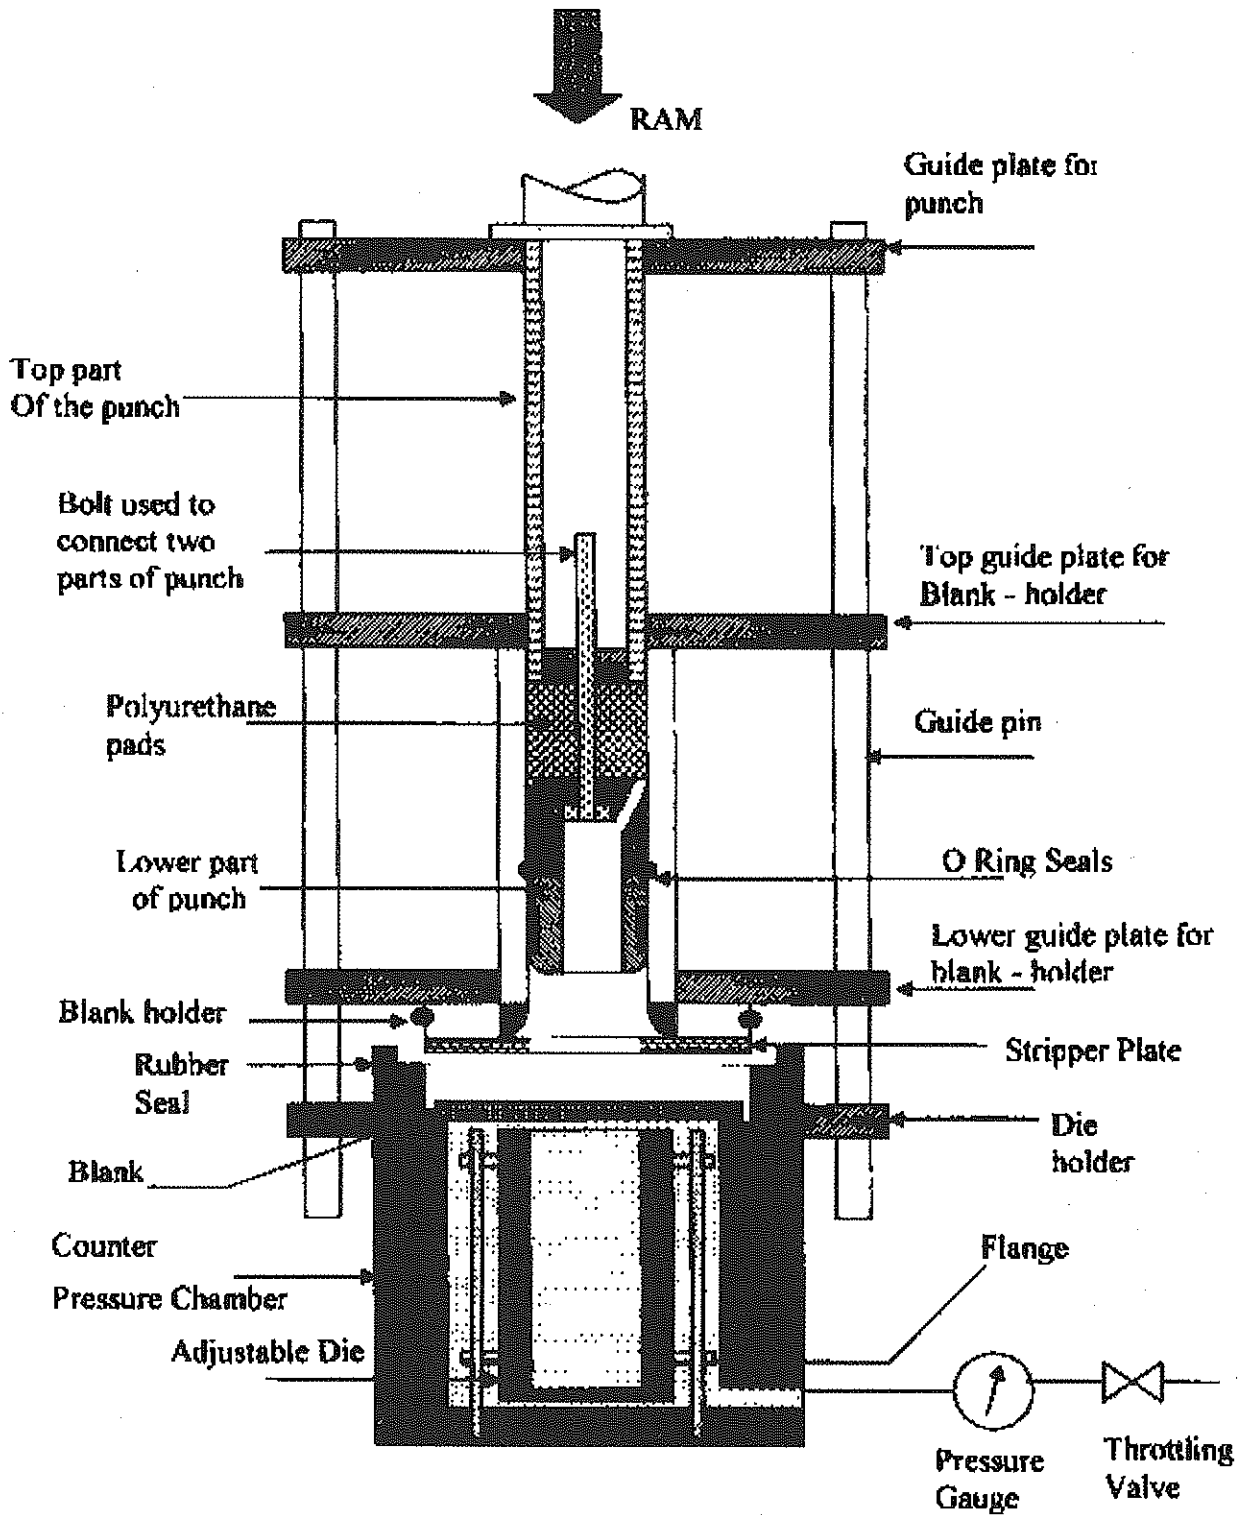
FIGURE I: A Sectioned Front View of the Deep Drawing Rig
